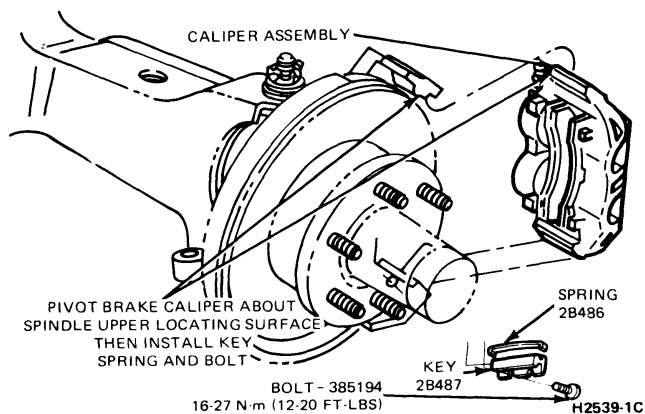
Disc Brake System—F-250, -350 (4x4)
